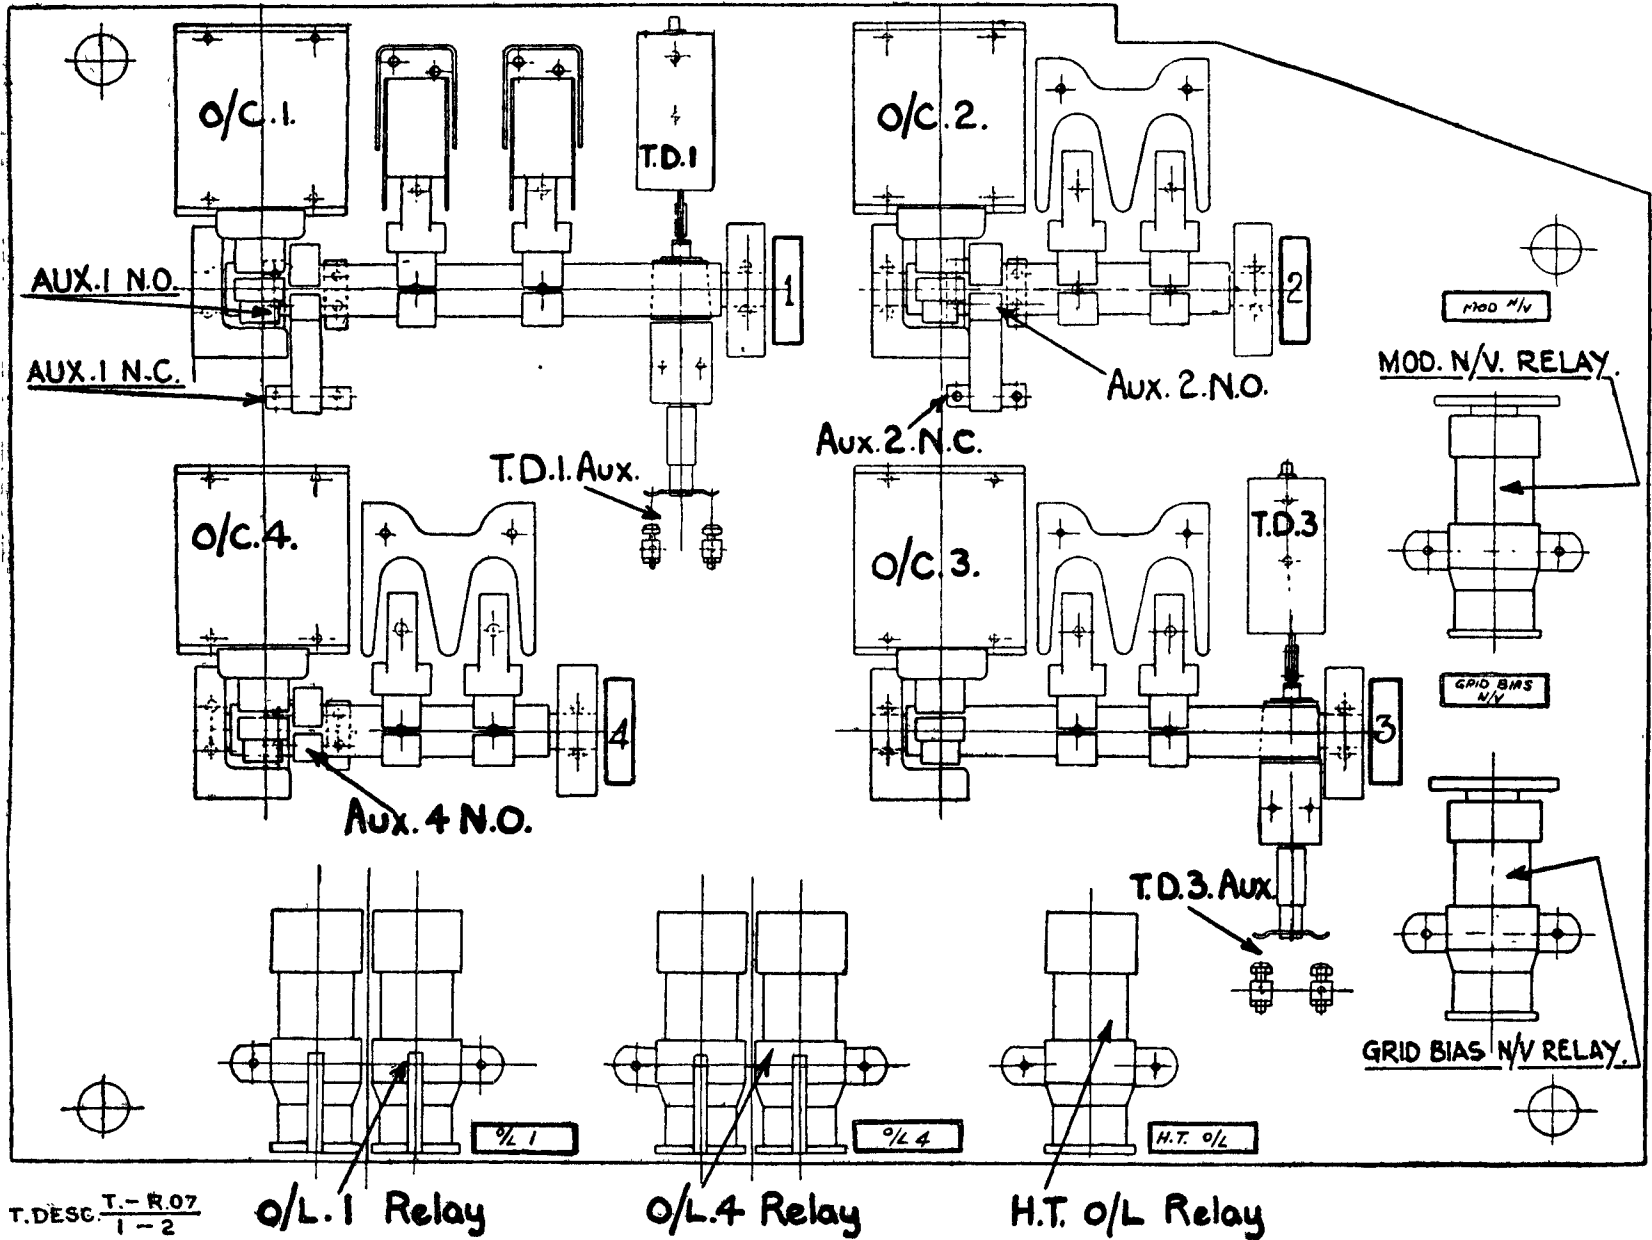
Assembly of Contactor Panel (see fig. 13 for Schematic)
